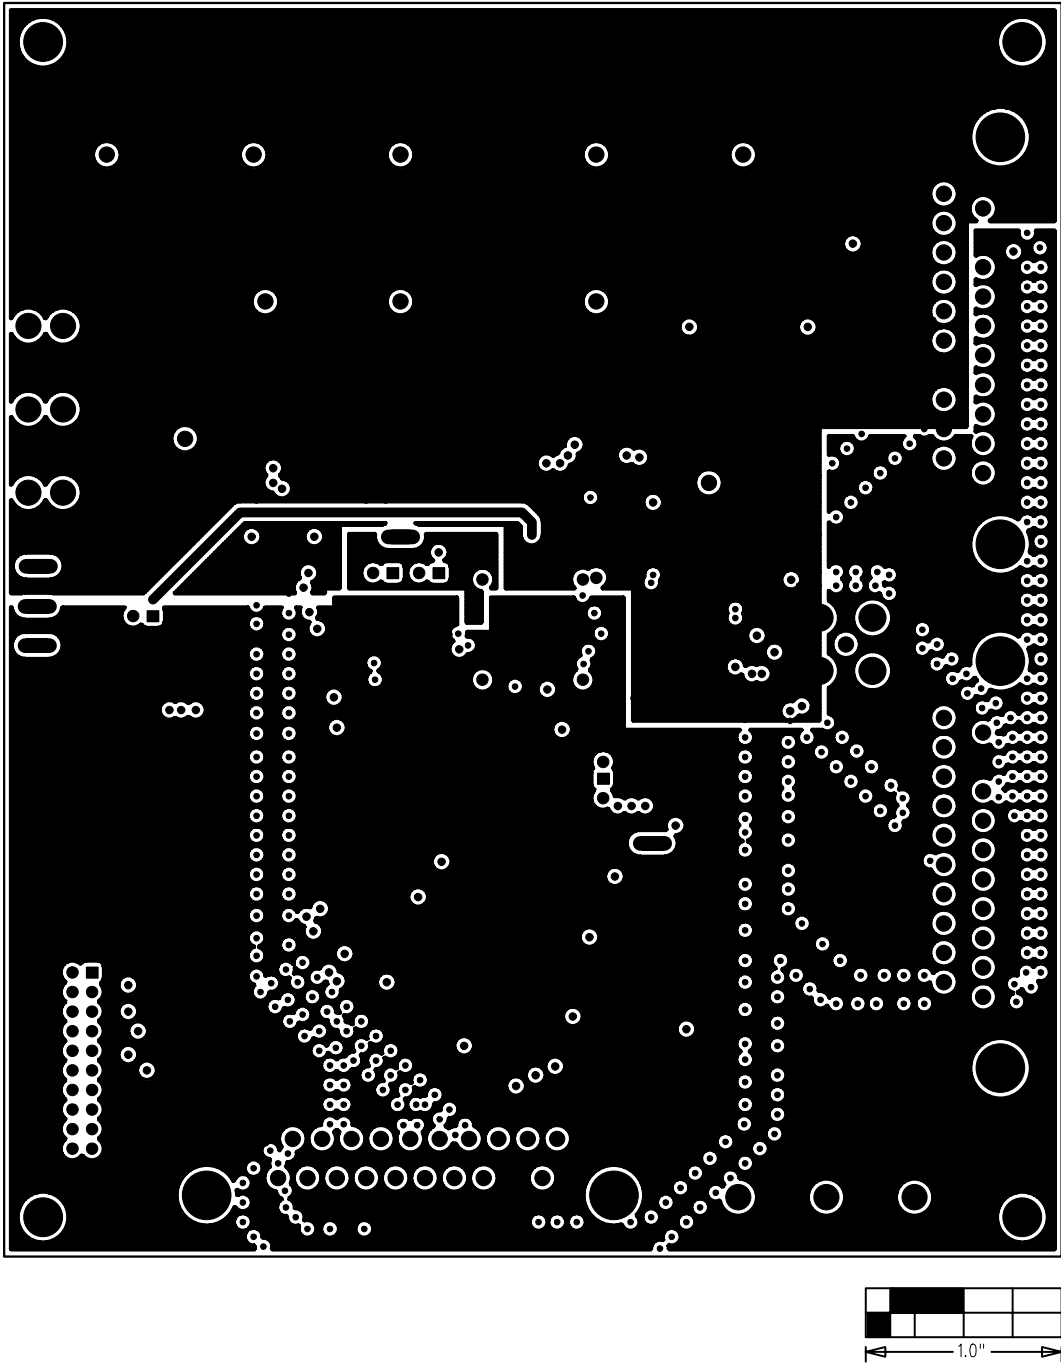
MAX4399 EV Kit PCB Layout—Inner Layer 3
